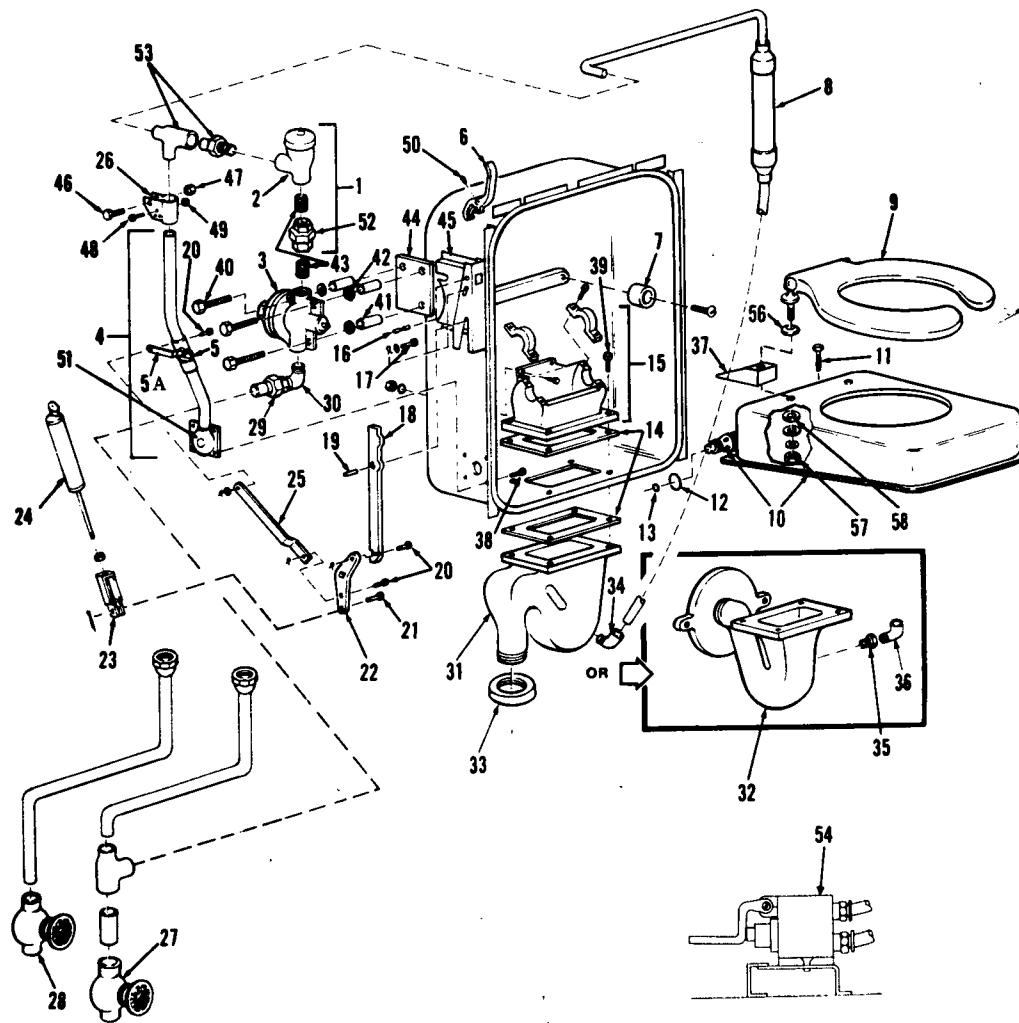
MODULAV BODY ASSEMBLY (Right-hand Model Shown).
